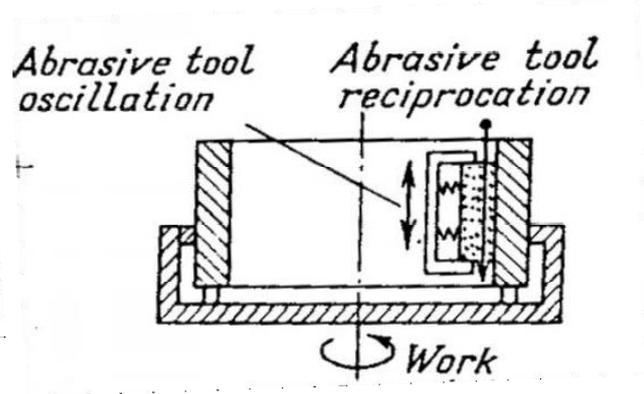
shows that internal cylindrical surfaces can also be superfinished by axially oscillating and reciprocating the stones on a rotating workpiece.
